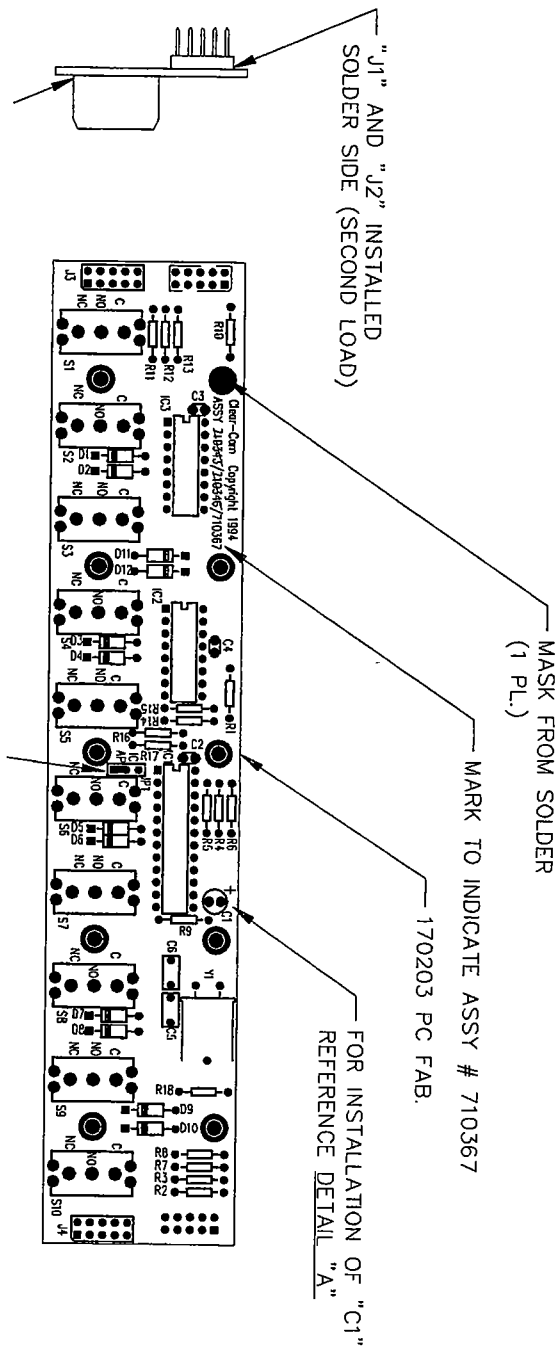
Assembly Drawing—AP-22 (IFB Assignment Panel) Rev. B
